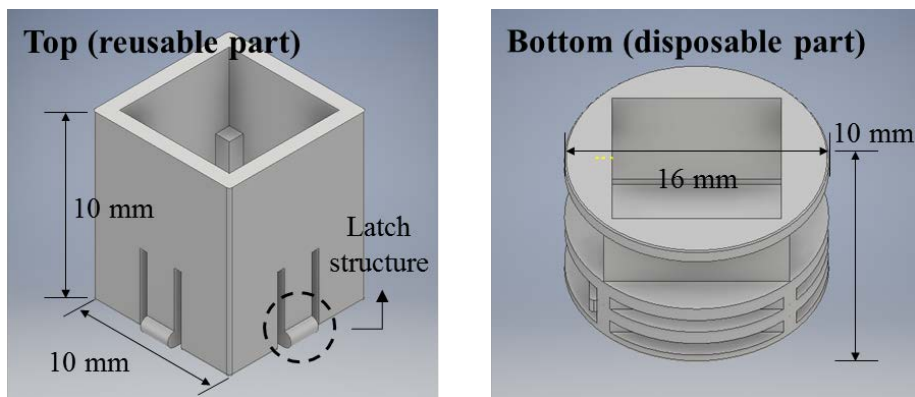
Top (reusable part) and bottom (disposable) view of the design of housing parts.
